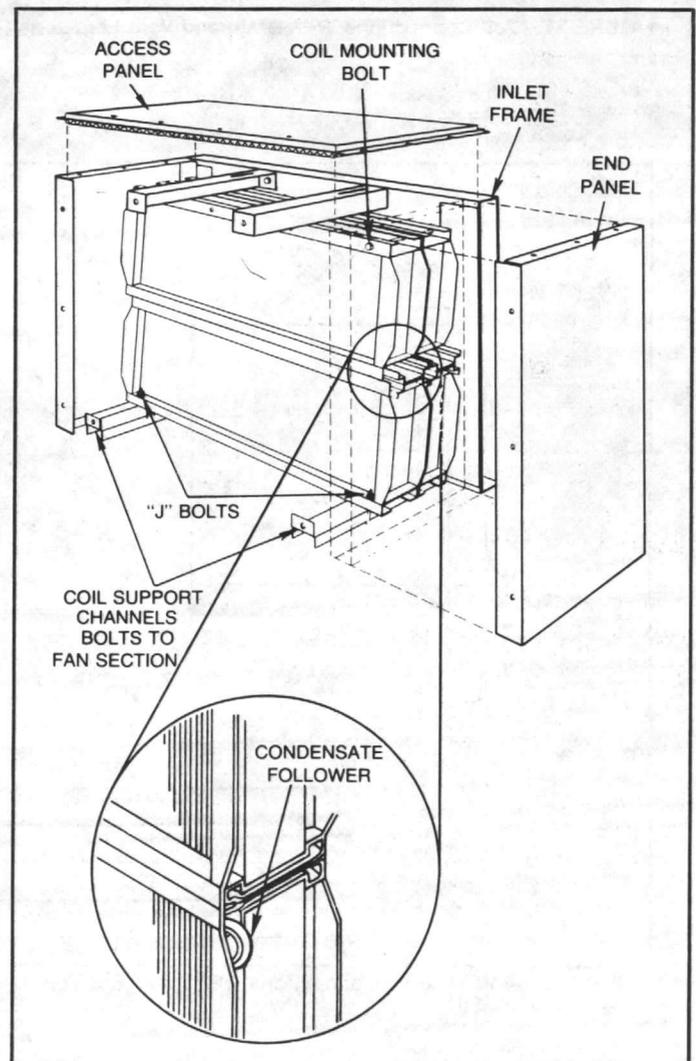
B - Draw-Thru Unit Coil Section Details with View of Condensate Follower
